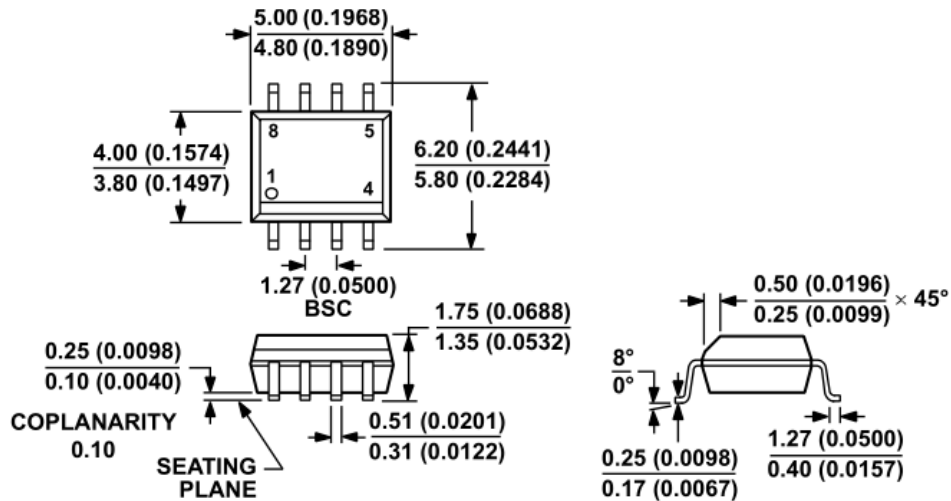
SOIC8 Package Shape and Dimension in millimeters (inches)
